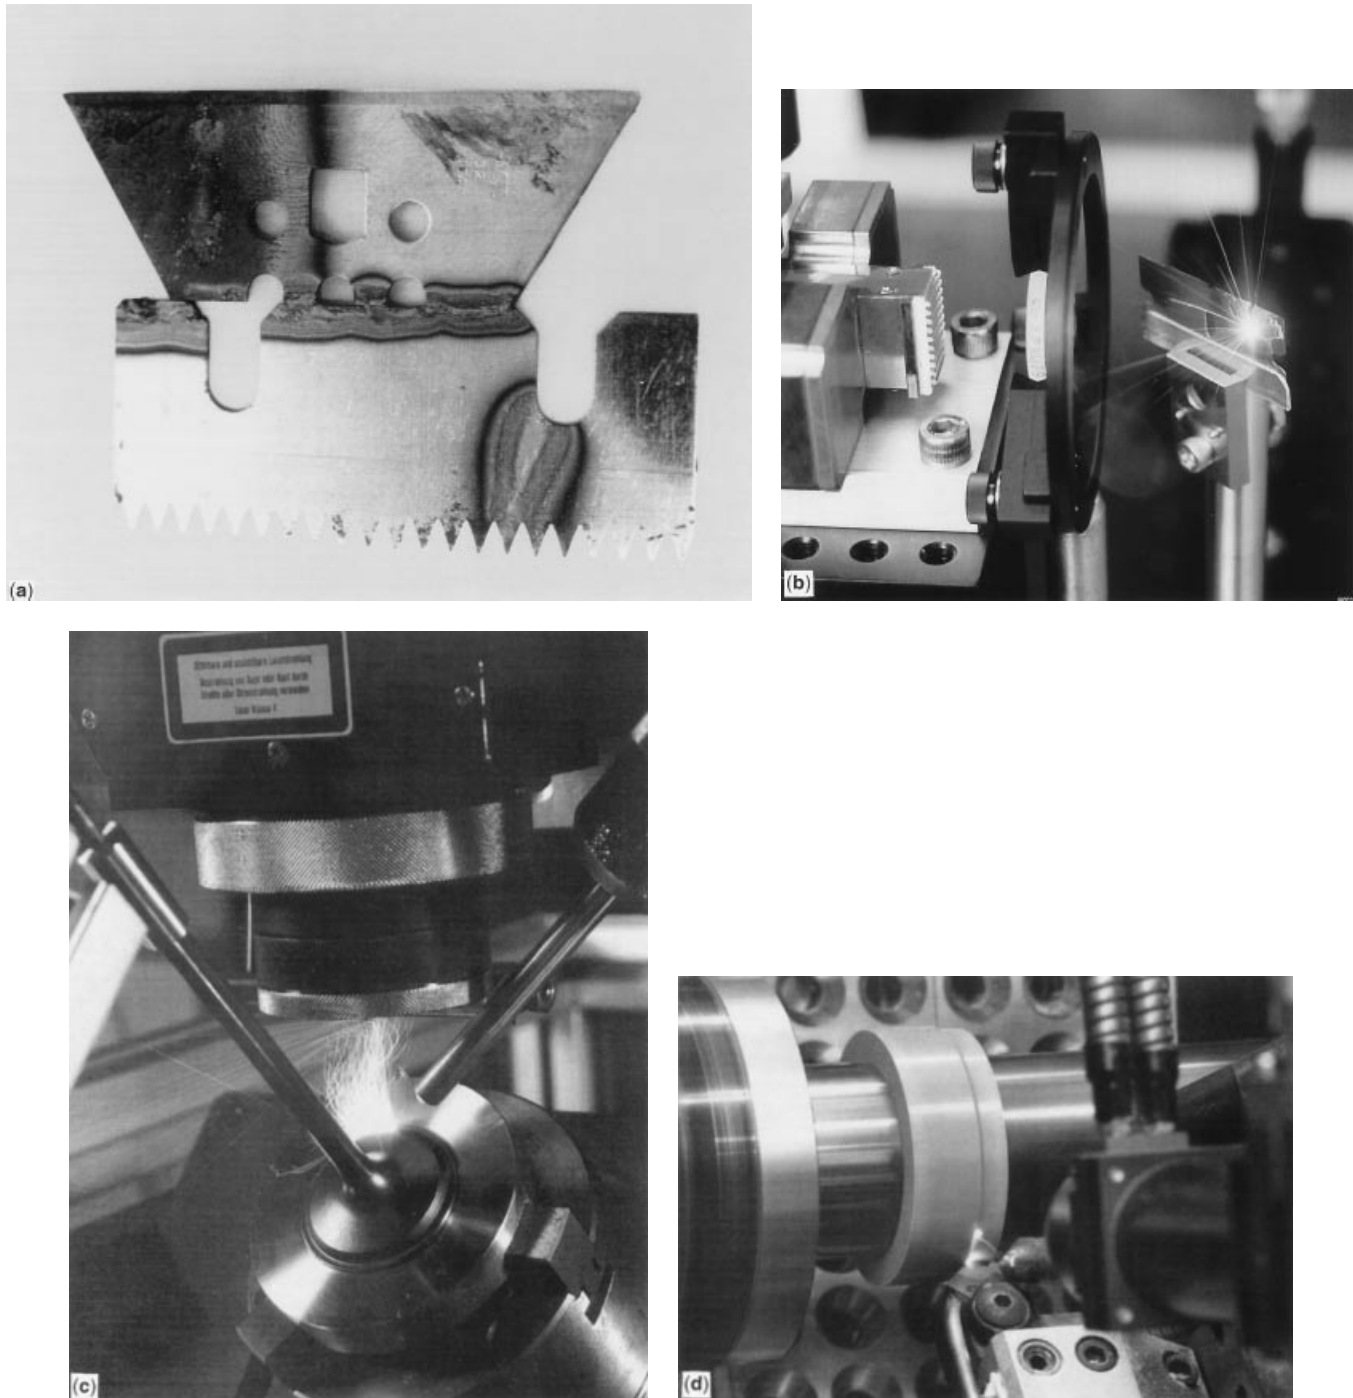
Diode laser welding, cutting, and cladding. (a) Welding of a razor blade to a steel saw blade. (b) Cutting a razor blade. (c) Cladding a valve by stellite powder. (d) Laser-assisted (heated) machining of SiN cylinder. [Courtesy of (a) Zediker of Nuvonyx, (b) SDL Inc., (c) Fraunhofer IWS, (d) Fraunhofer Institute of Production Technology.]
